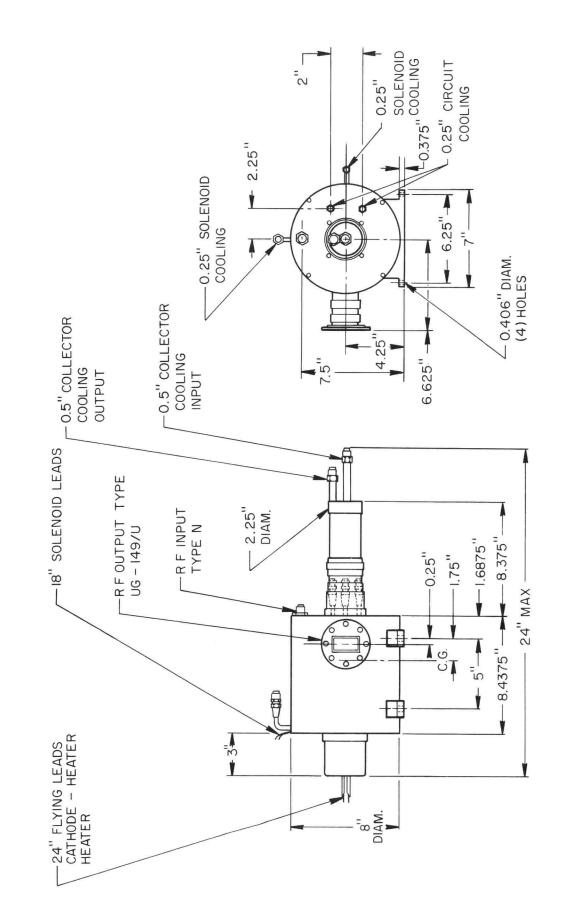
MOUNTING ATTACHMENTS
